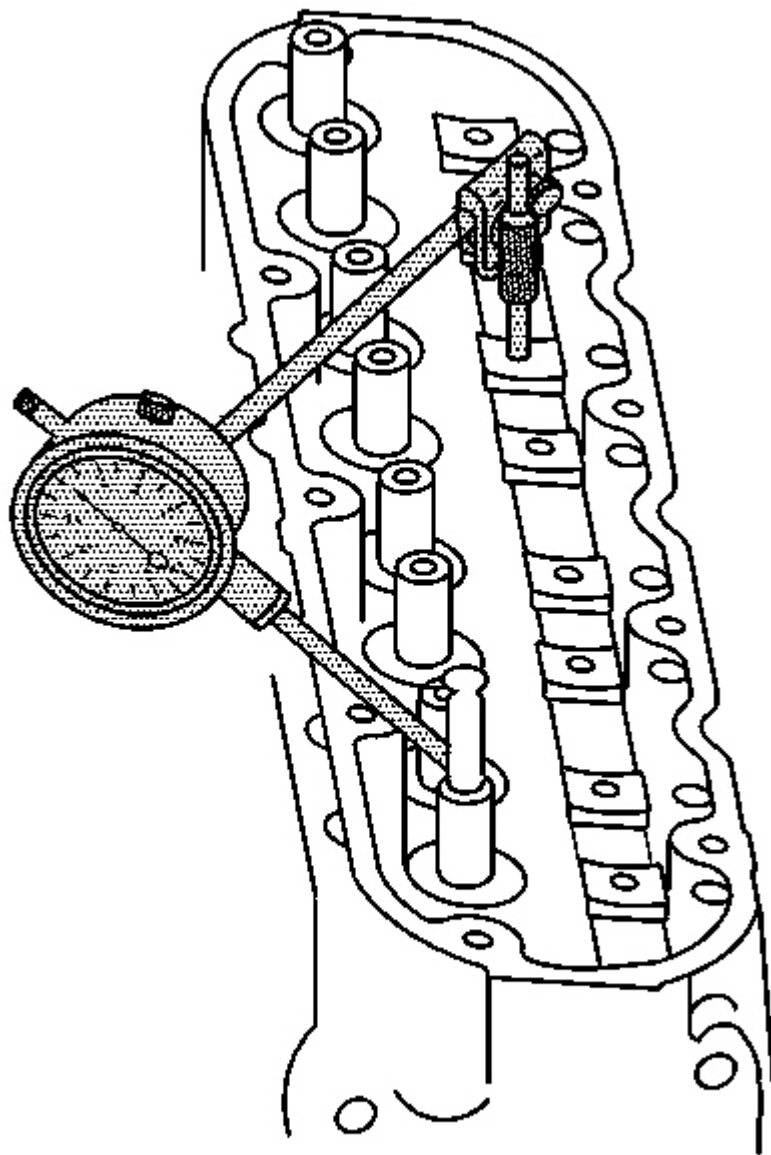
Measuring Valve Stem-To-Guide Clearance
